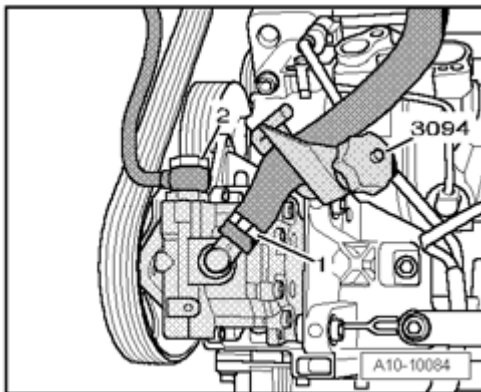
Identifying Hydraulic Hose, Hydraulic Pressure Line & Hose Clamps 3094
